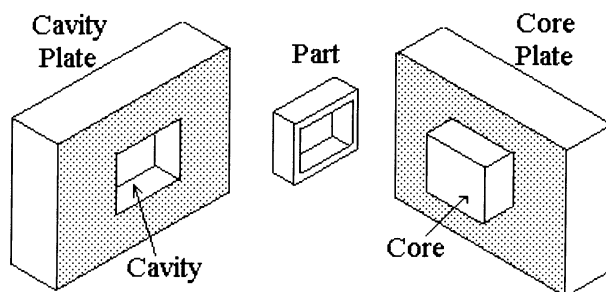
Tooling for box-shaped part—shows parting surface between the core and cavity halves of the mold.
